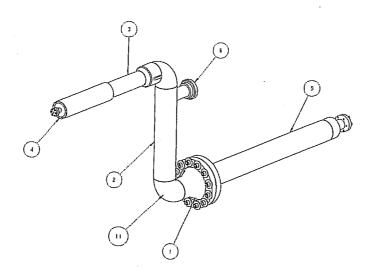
Isometric view of MBX1. 1-Housing with Lambda Plug; 2-Vertical Pipe Section; 3-Horizontal Section (this connects to magnet); 4-test Cap (this is removed for tunnel installation); 5-Conductor Protection Tube (this is removed for attachment to DFBX); 6-Helicoflex Sealing system; 11-Short Radius 3 IPS Weld Elbow.
